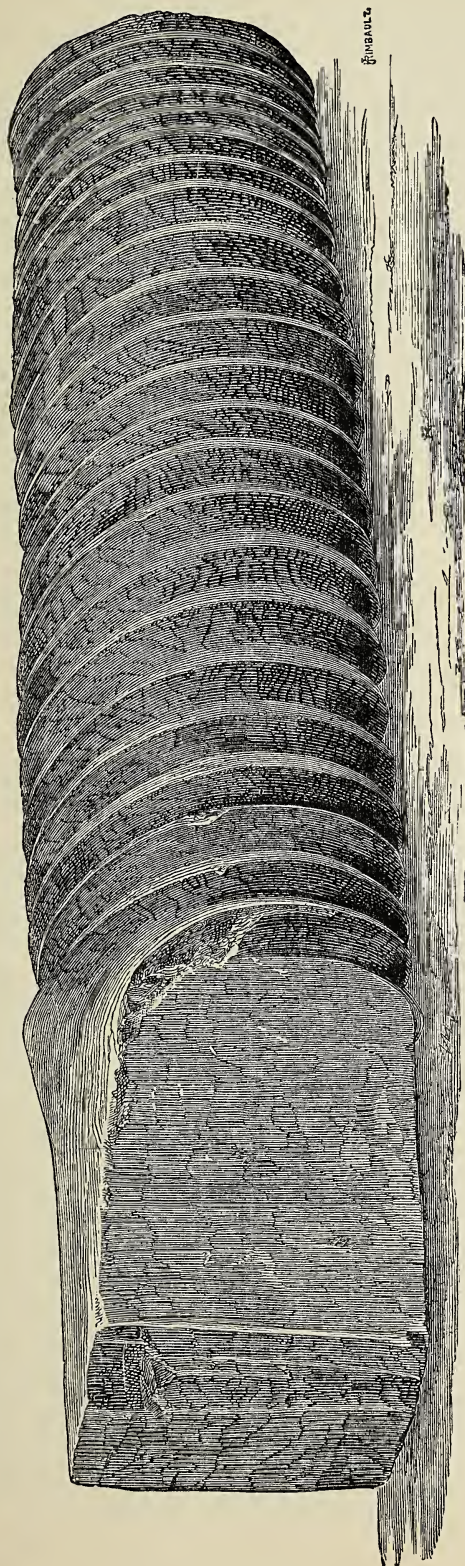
4-in. Square Bar of Bessemer Steel, twisted hot.
